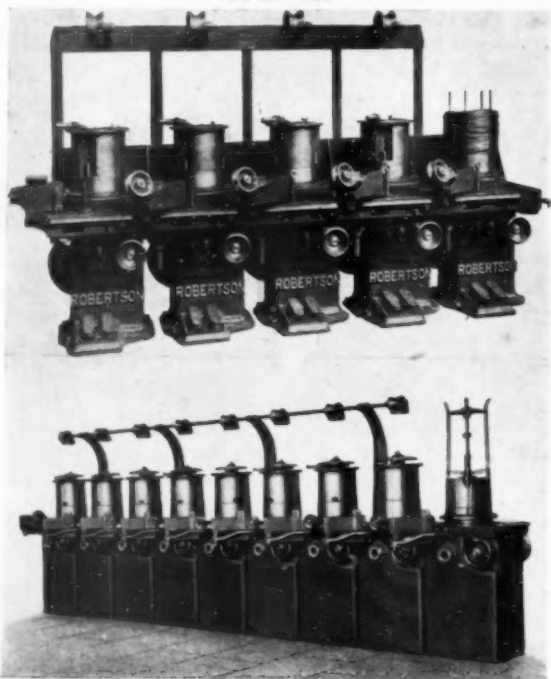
A nine-hole drafting machine for reducing the material to 30 S.W.G.
